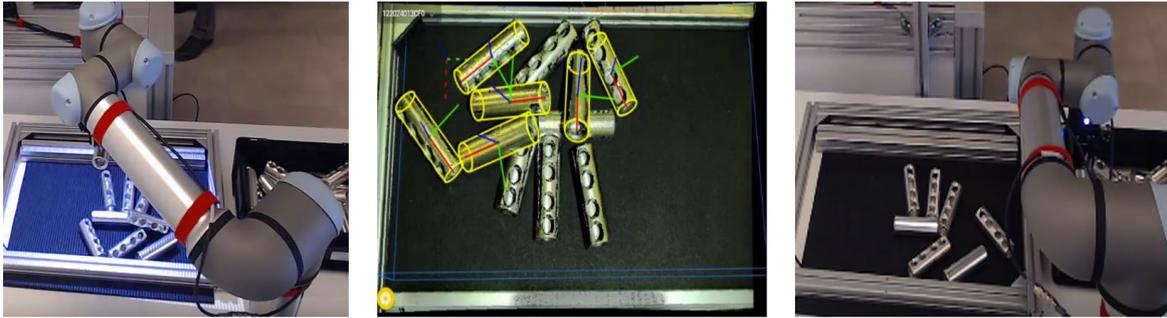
From left to right: picking cylinder, projecting structured light, detecting hole/ no hole cylinders for next cycle, placing cylinder onto conveyor
